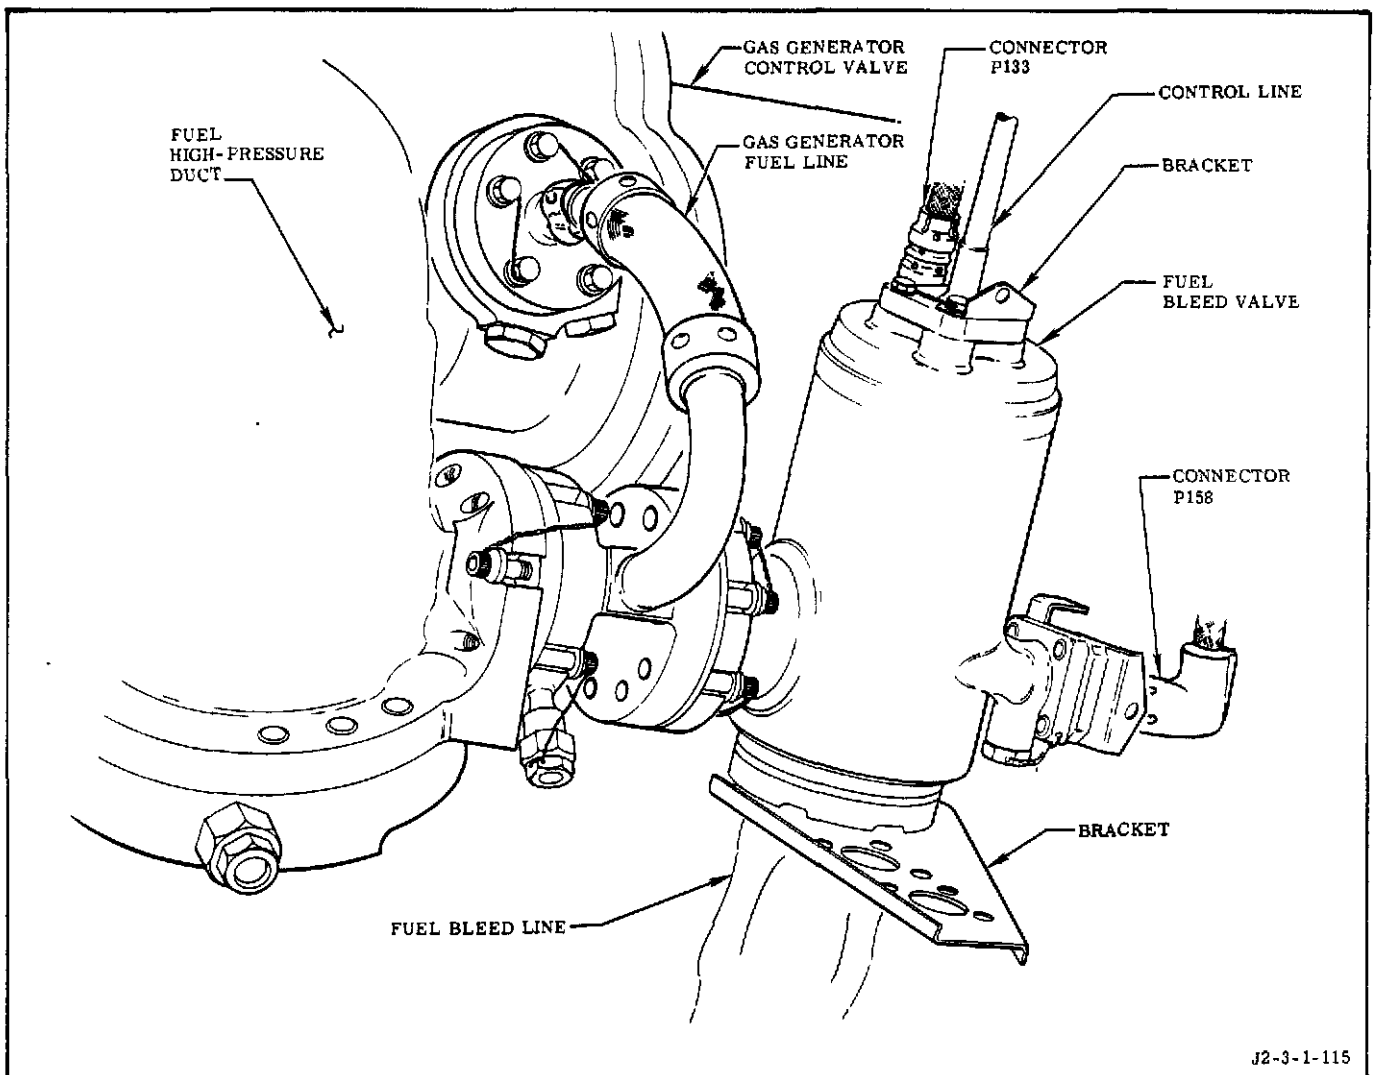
Fuel Bleed Valve and Gas Generator Fuel Line
